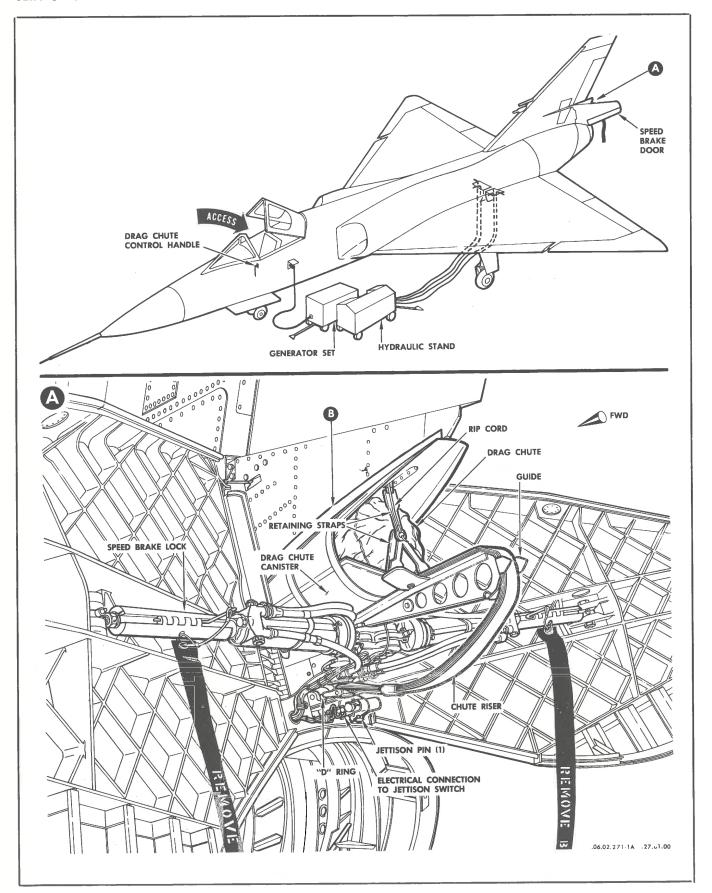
Drag Chute Installation (Sheet 1 of 2)
